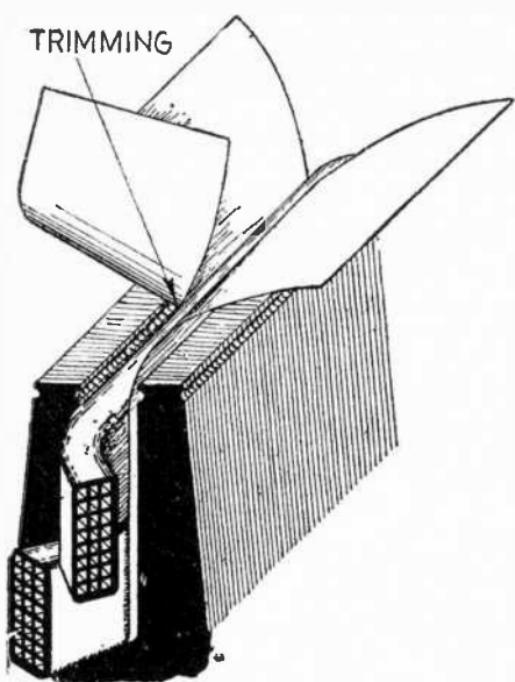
,211.—Slot with coils inserted showing trimming of slot cell.
